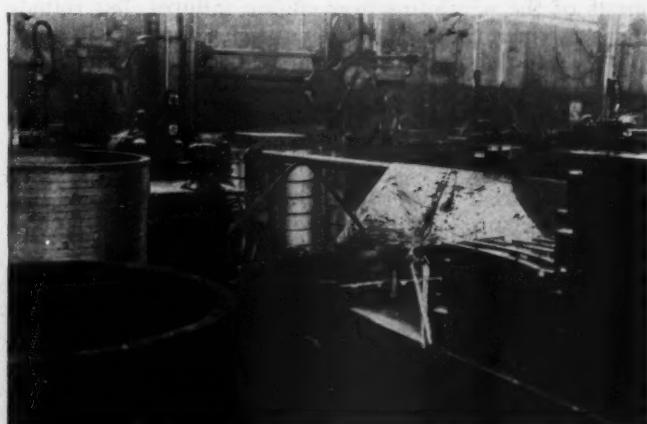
After assembly the rings are dipped in a bath of lubricant, made up in sets and wrapped in burlap for shipment to the outfitting points on the system
